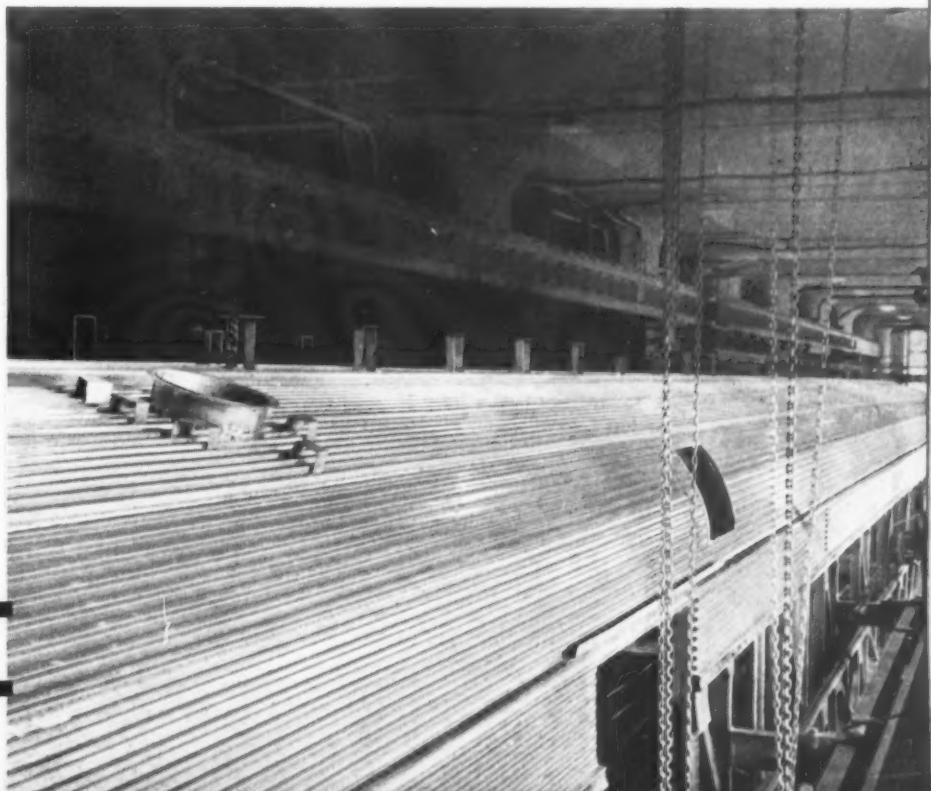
View of a General Assembly Jig Showing the Floor, Roof, and Side Frame Structure in Place
